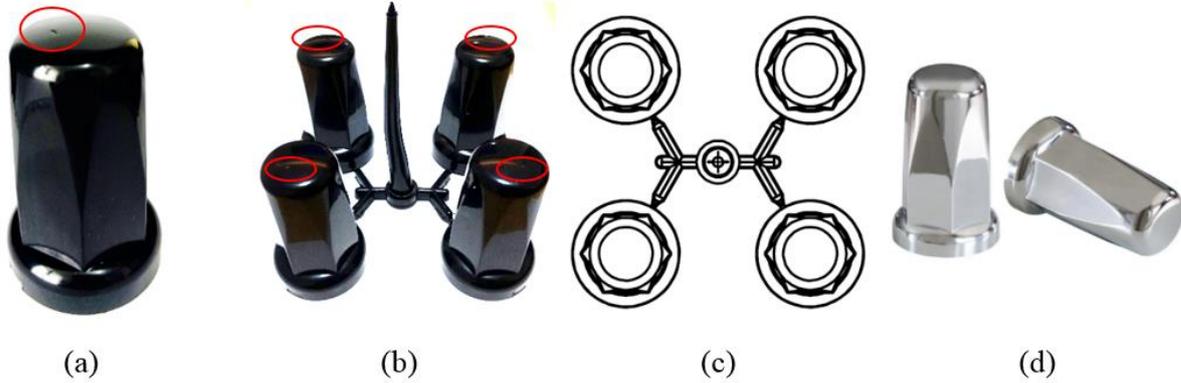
Capa Porca Belga 32: a) Individual failure presentation. b) Joint injection failure. c) Top view of the CAD drawing of the product. d) Final product marketed.
